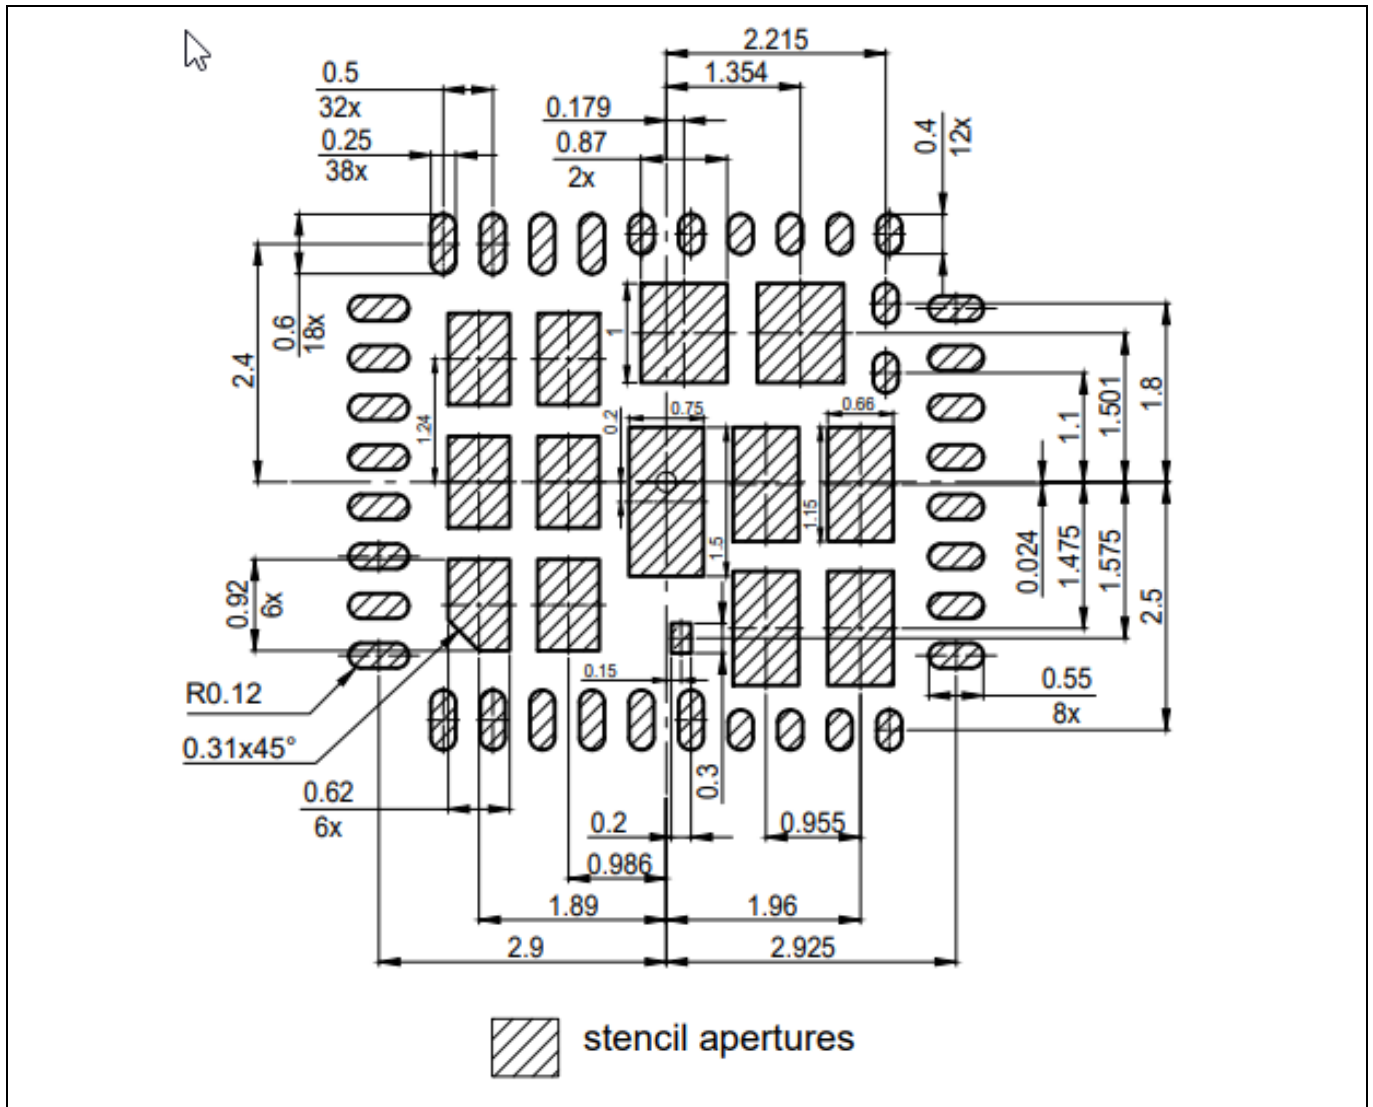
Stencil pad size and spacing (all dimensions in mm)
